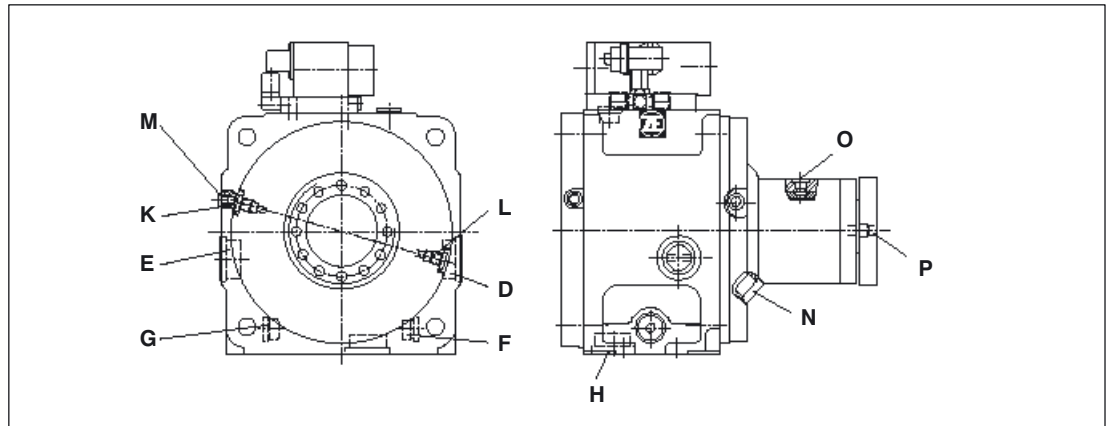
Selector gearbox with selector unit for frame sizes 132 and 160
